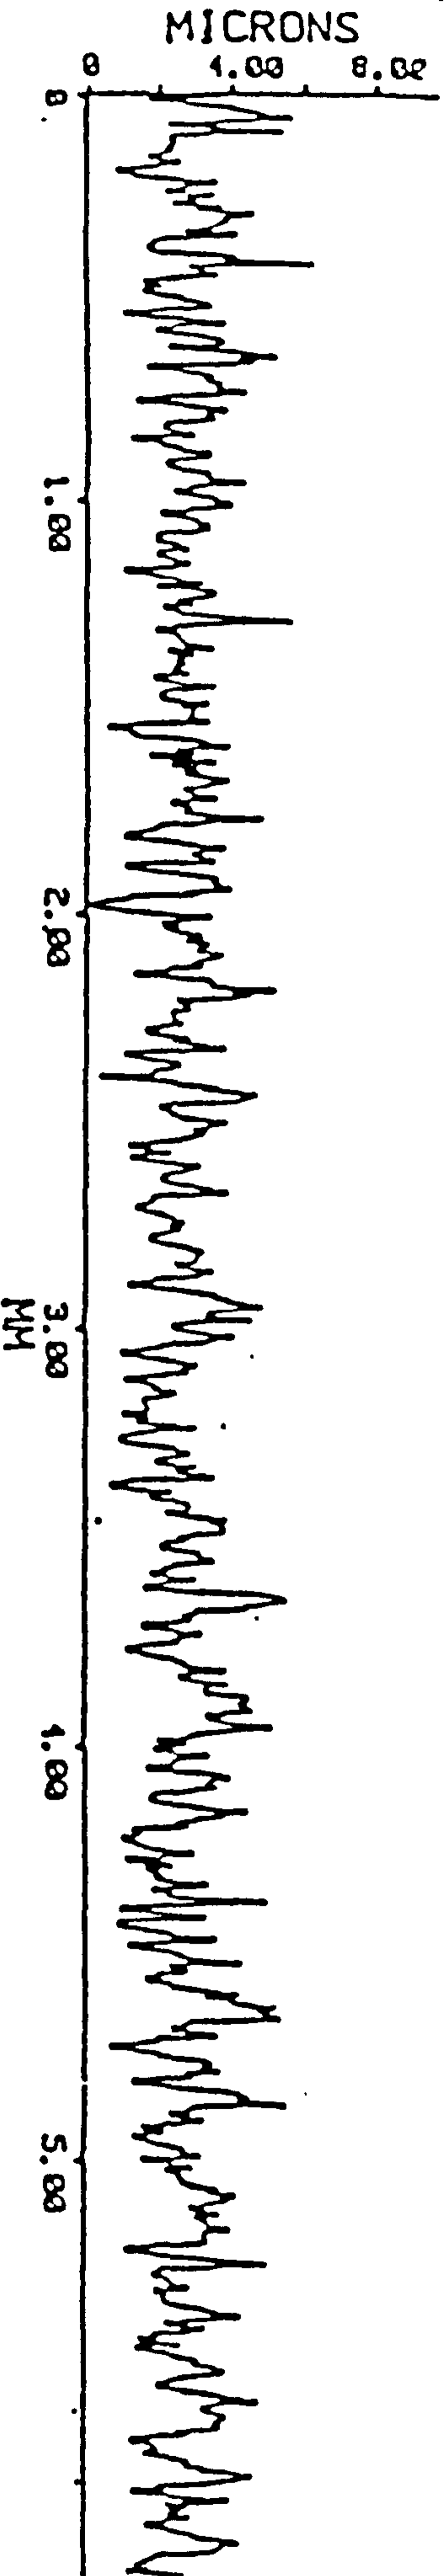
Honed (Unhorn) Surface Finish of a Diesel Engine Cylinder Liner.
